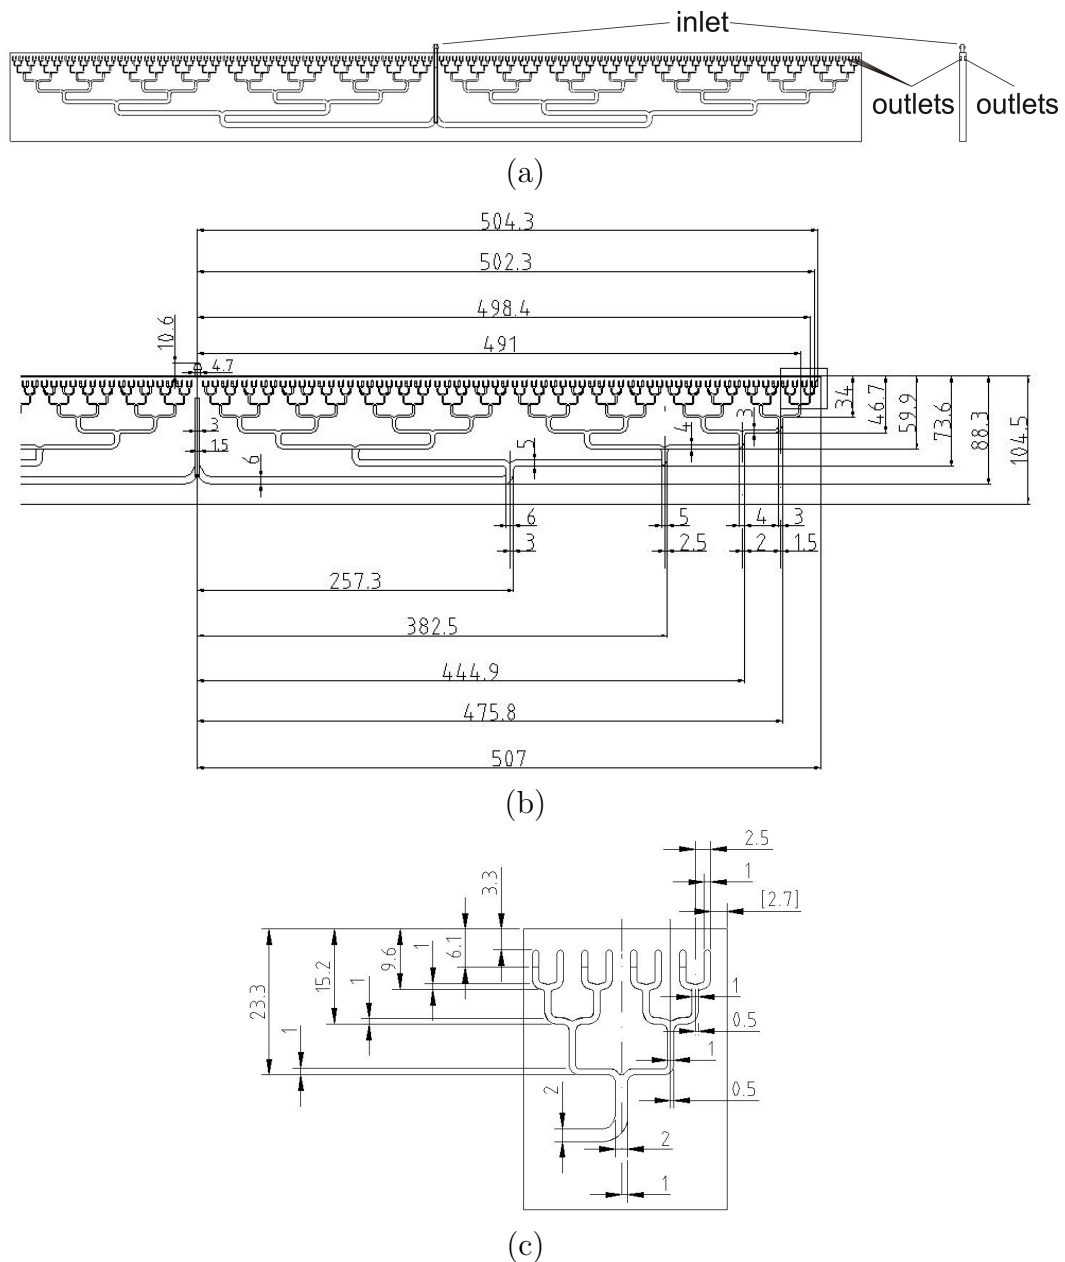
Distributor BS (a) top & side view (b) detail base plate (c) detail outlets, dimensions are given in millimeters
